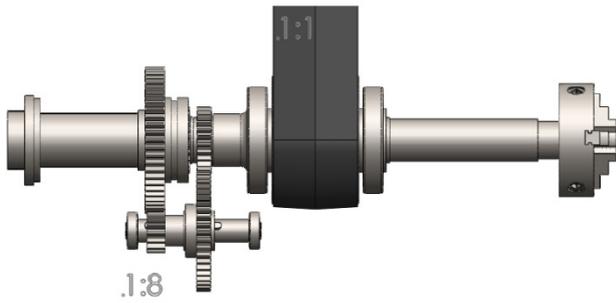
Models for the spindle gear to achieve a gear ratio of 1:8
